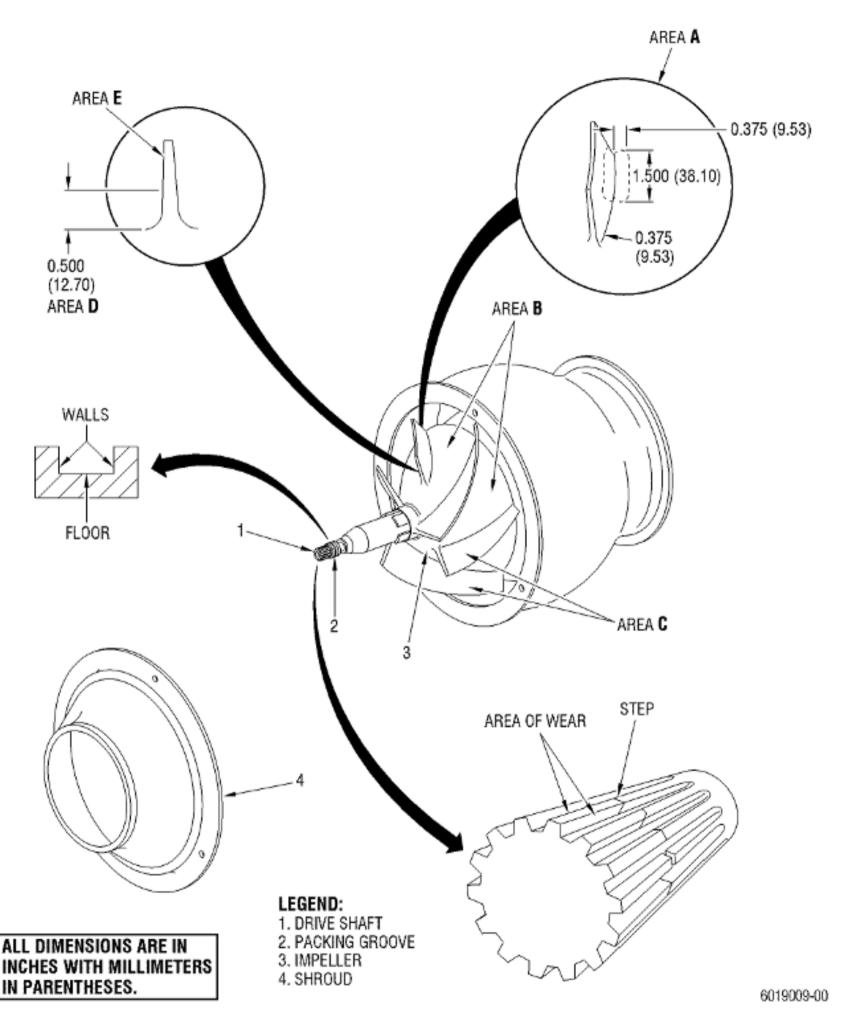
(Sheet 3) Particle Separator Blower - Inspection
